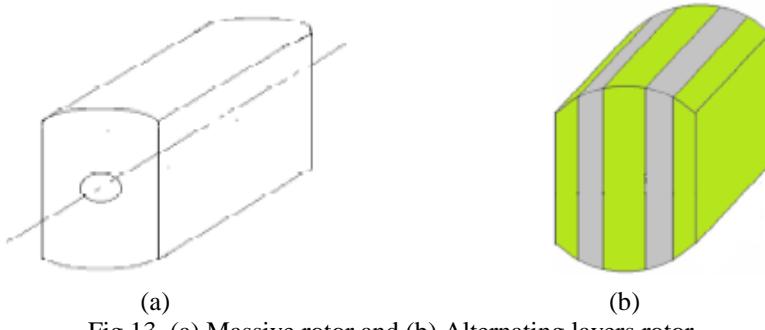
(a) Massive rotor and (b) Alternating layers rotor
